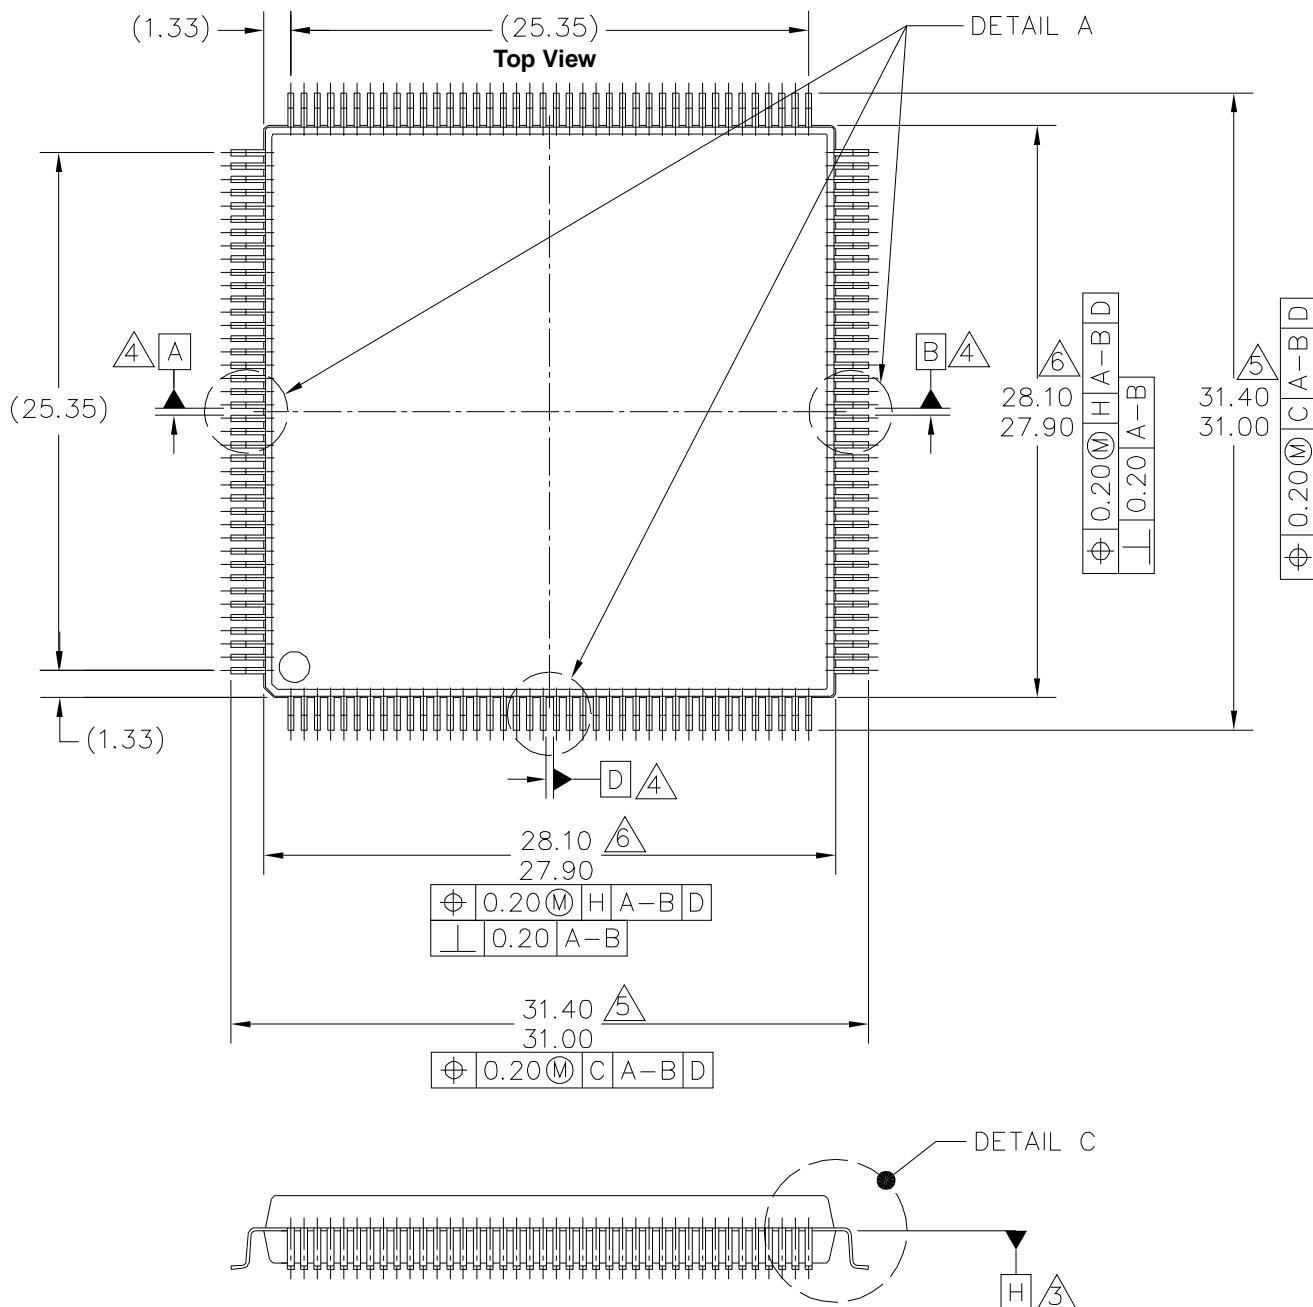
MCF5208CAB166 Package Dimensions (Sheet 1 of 2)
